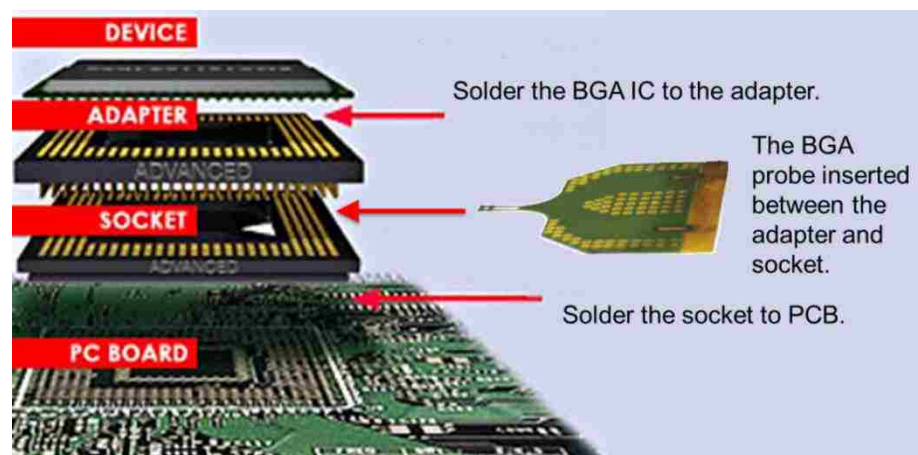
The Scheme of Using the BGA Probe with BGA-Adapter-Socket System
